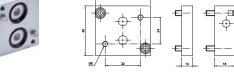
Plate to convert a 5-way NAMUR-valve into an inline valve. The NAMUR ports 2 and 4 are transferred into the plate and offer G ¼" BSP threads. Mounting plate can be assembled independently and the valve is attached later-on.
